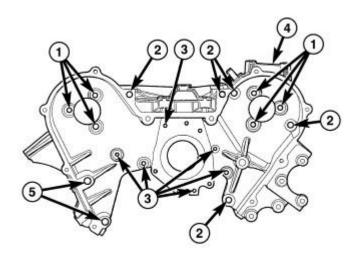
CAMSHAFT SEAL Courtesy of CHRYSLER LLC
